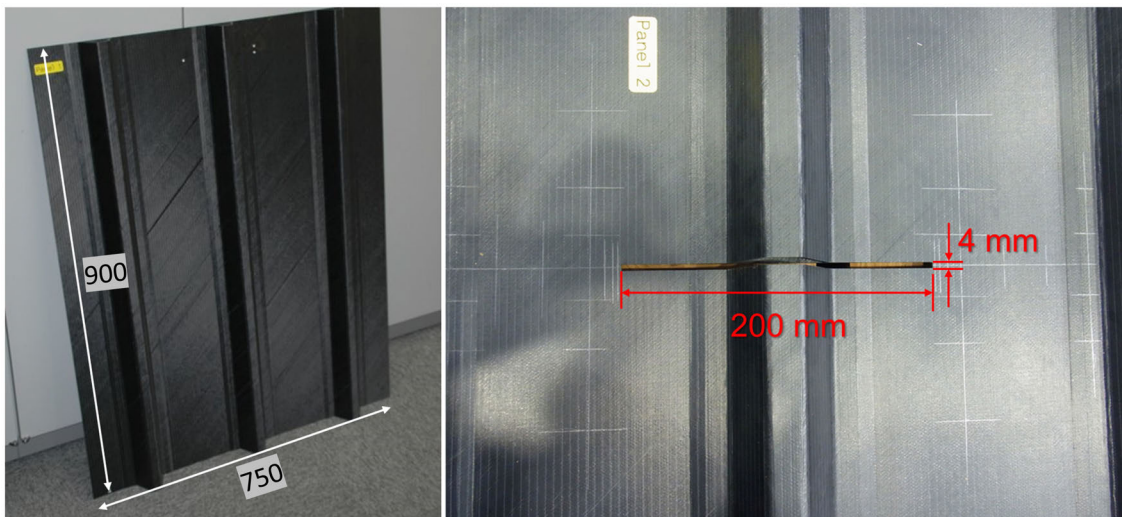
A photo of the specimen and a detailed photo of the machined centre-notch. All dimensions in mm.
